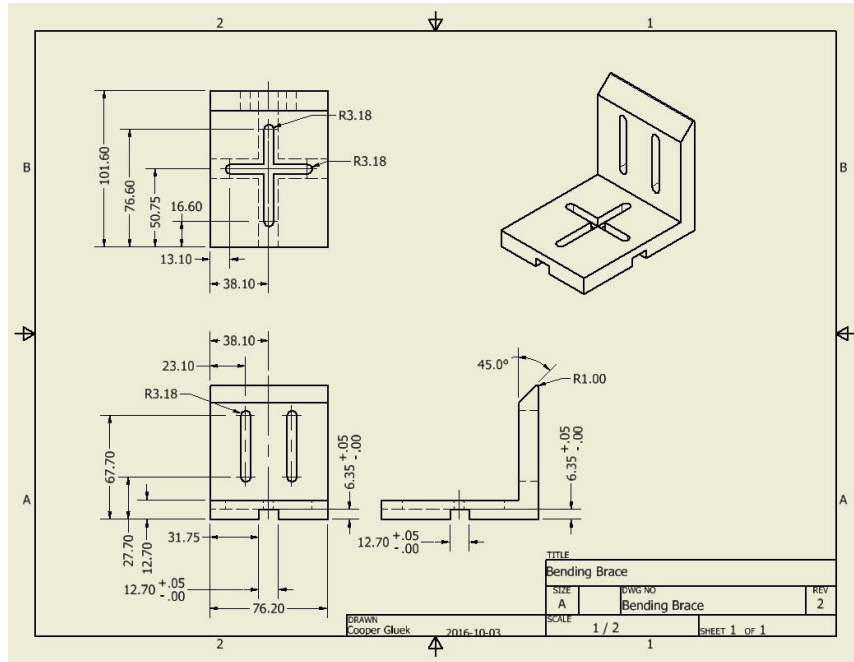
Dimensional Drawing of Bending Brace L-Bracket
